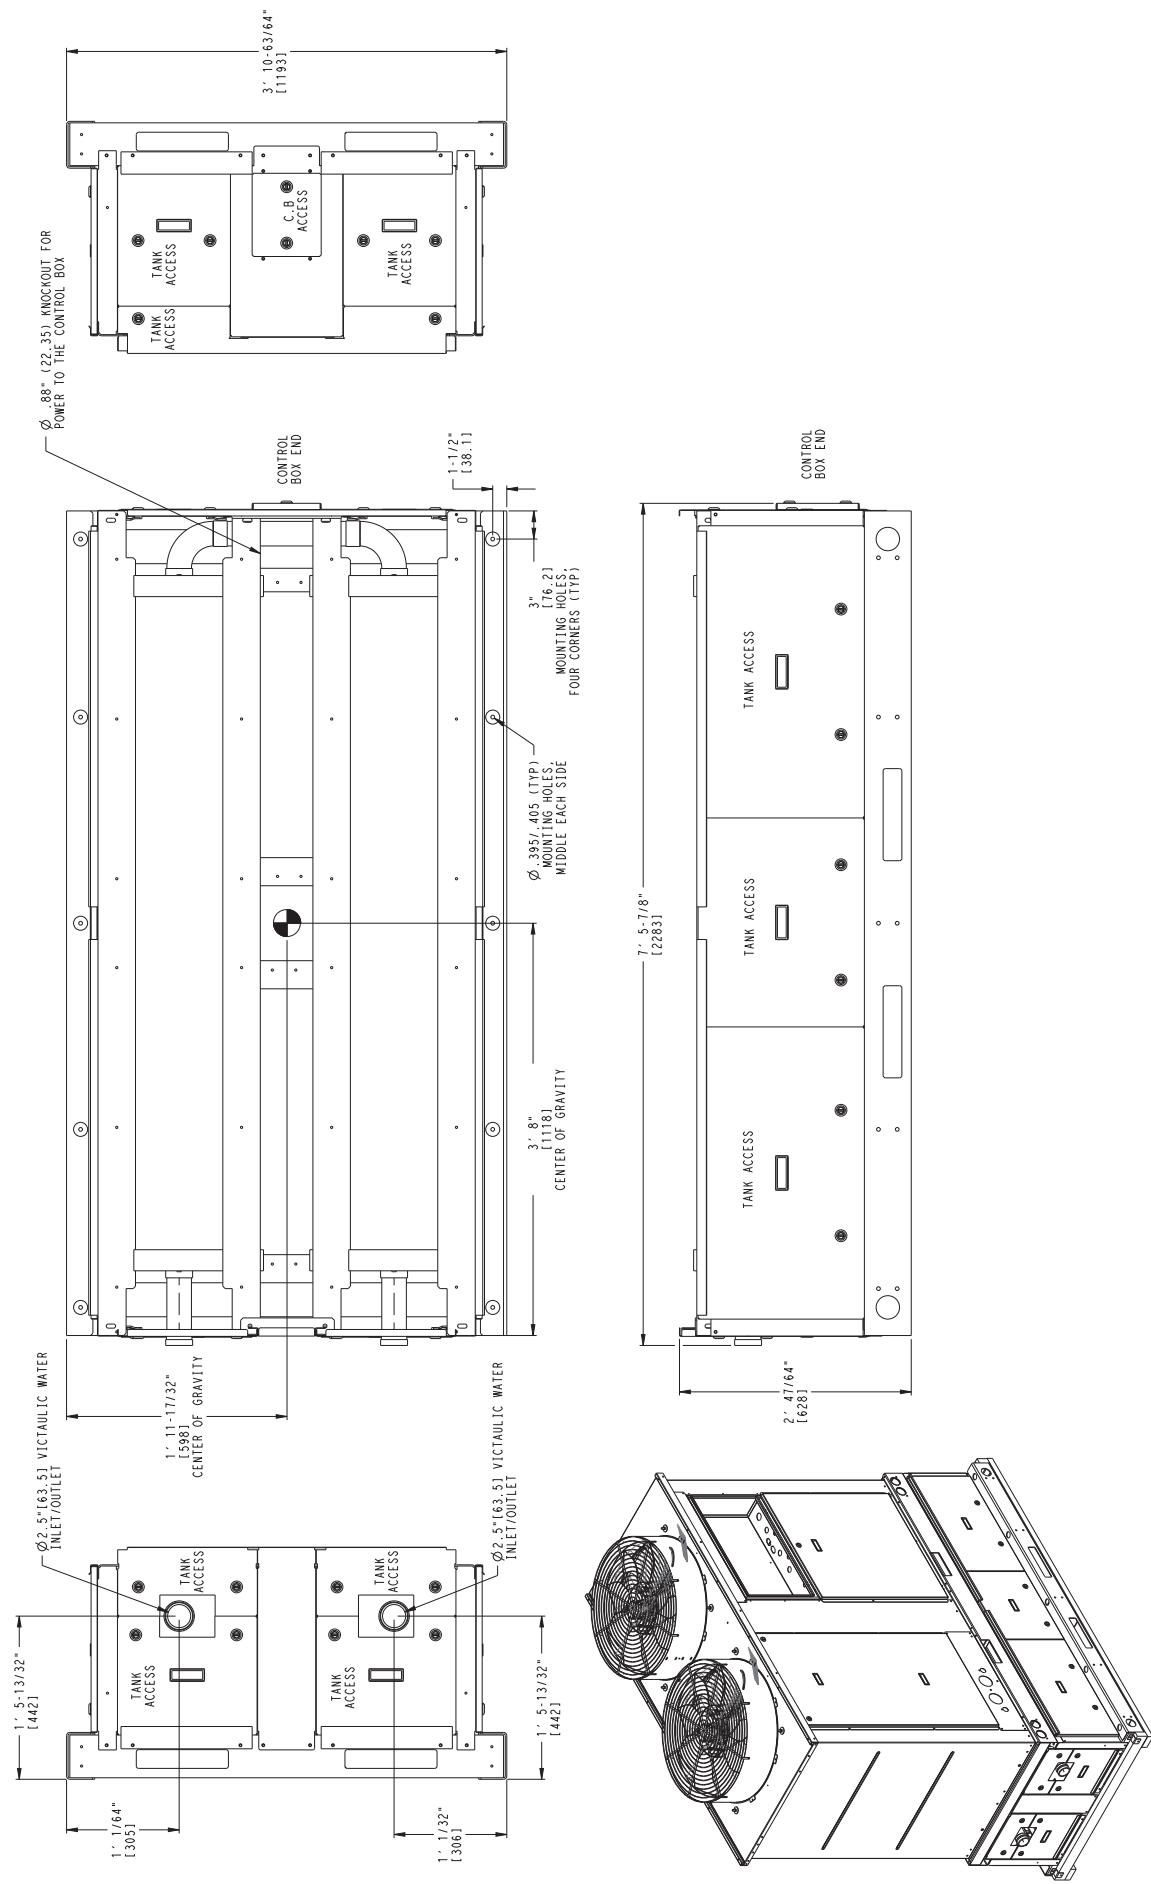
Accessory Storage Tank Dimensions — 30RAPP018-030 Units
